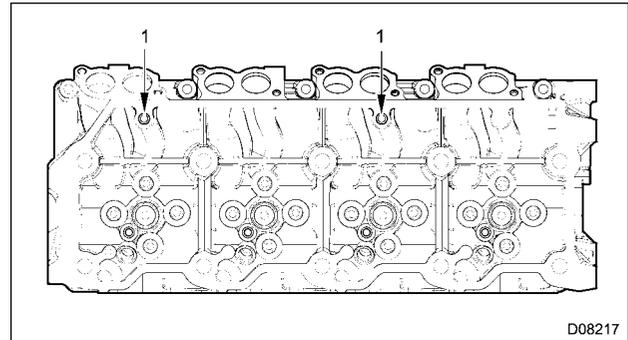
2006 Model Year cylinder head (two tapped M10 holes)
